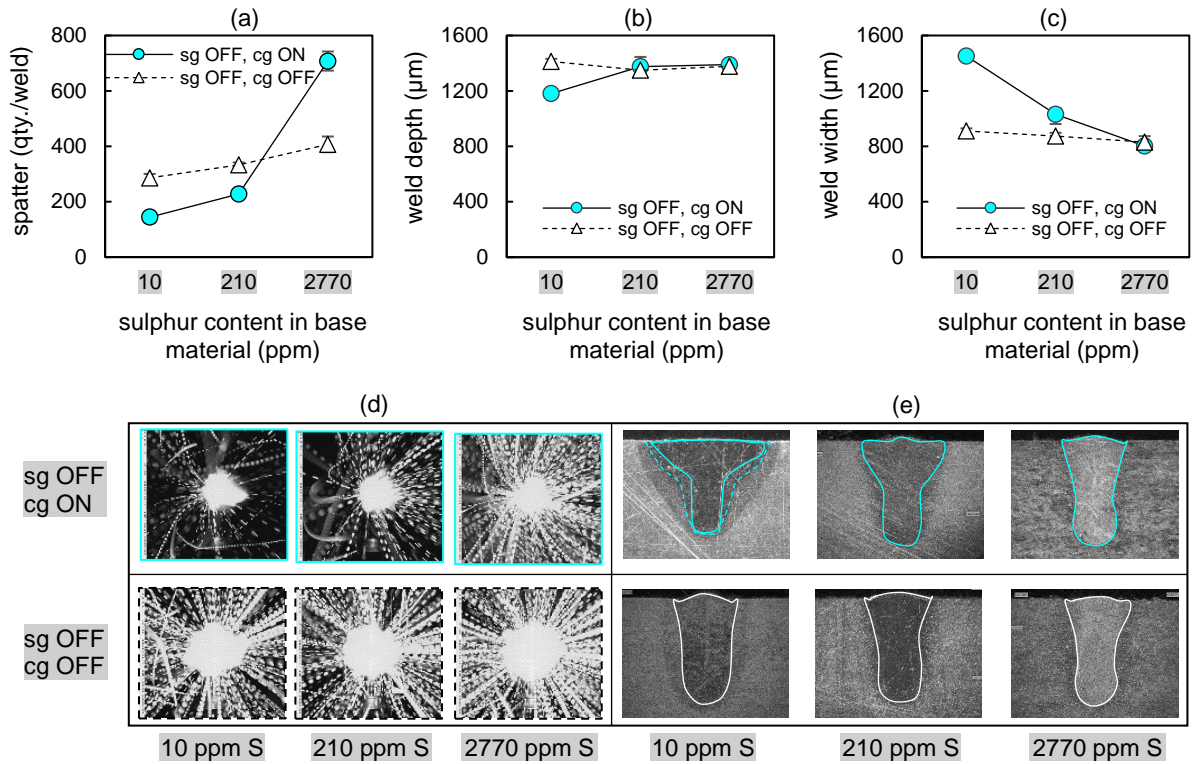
Spatter quantity per weld seam (a), weld depth (b), weld width at specimen surface (c), superimposed images (d) and weld seam cross-sections (e) as a function of sulphur content within base material and process gas configuration (sg=side-gas, cg=center-gas). Welding velocity $v = 1.5$ m/min, laser power $P = 600$ W. $N = 3$.
